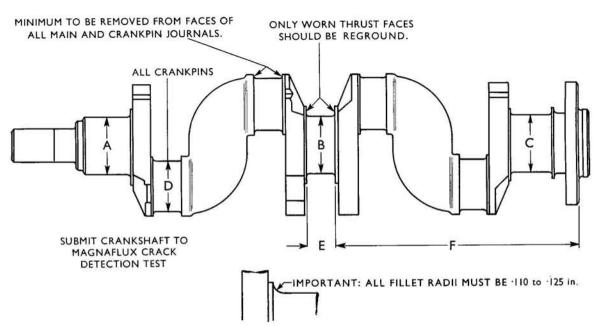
Crankshaft journal regrind data diagram. The crank throw must be within 1.4975 to 1.5025 in.
